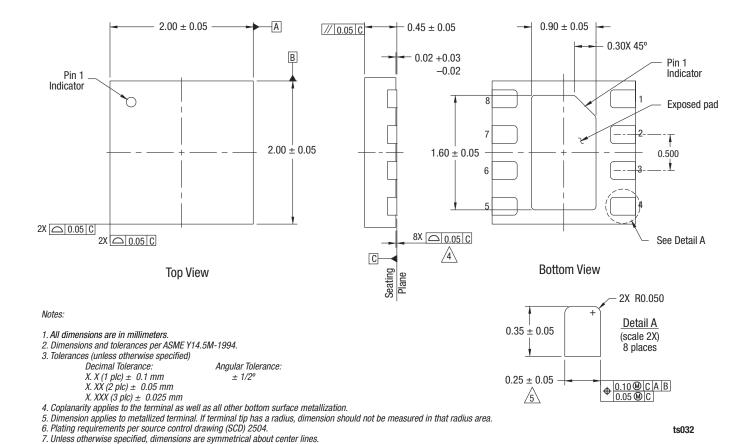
SE2568U 8-Pin QFN Package Dimensions
